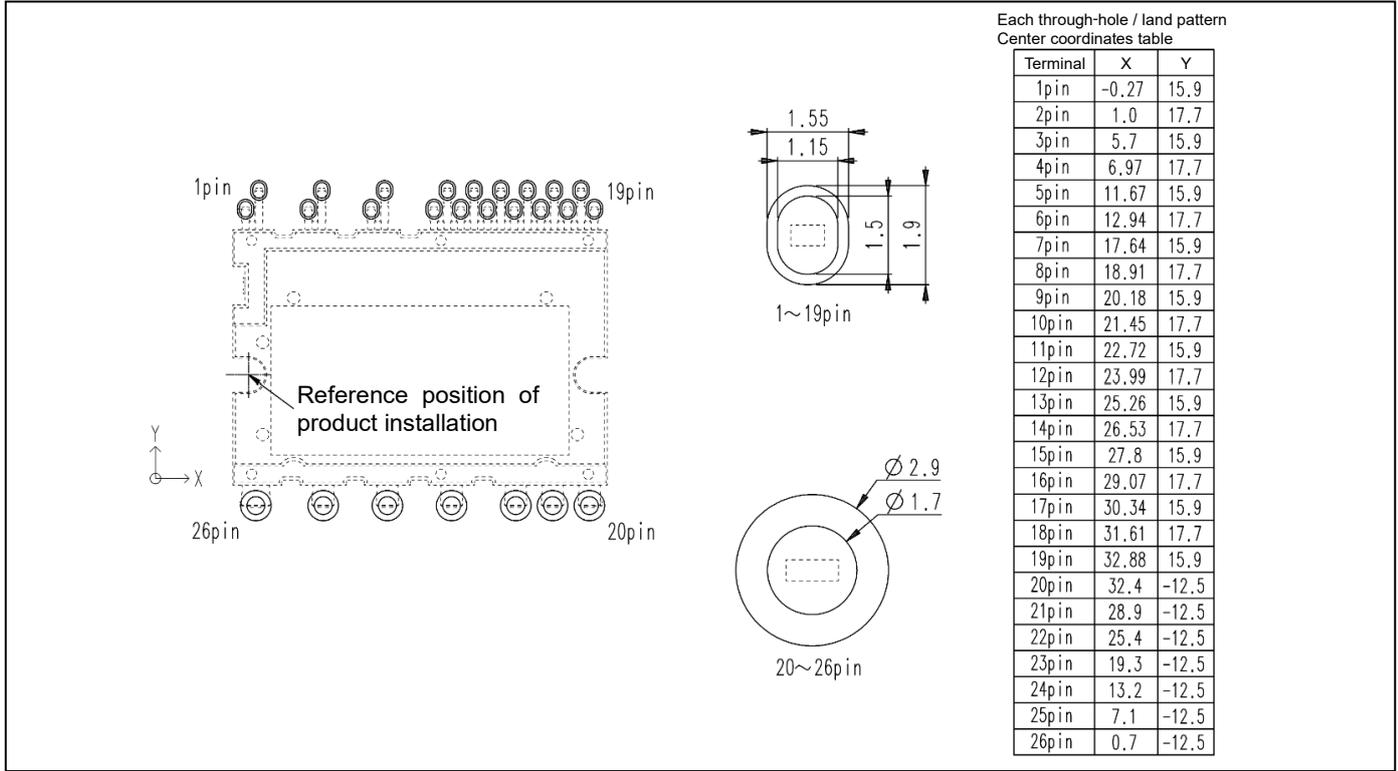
PCB through-hole pattern of PSSxxSF1F6 (Reference Figure)
